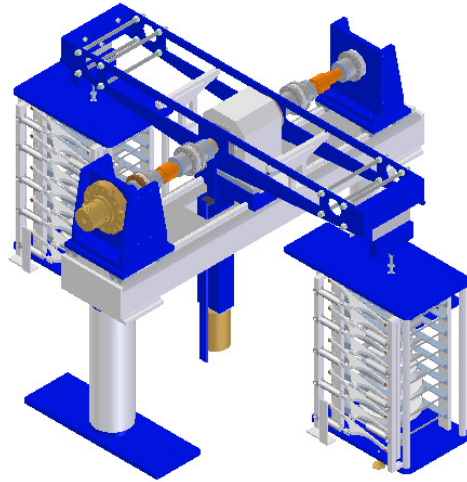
Hybrid Torque Standard Machine up to 1 kN·m.
